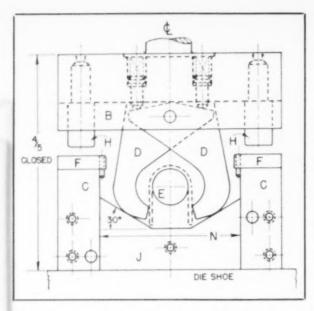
Drawing showing Ushape which part assumes upon descent of punches into forming die.
